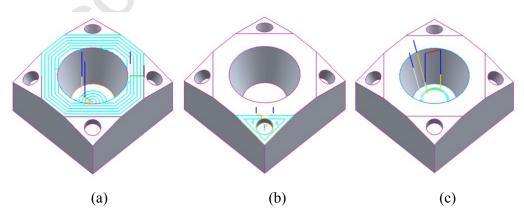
The cyan lines represent tool paths of (a) three-axis; (b) three-plus-two axis; (c) five-axis machining
